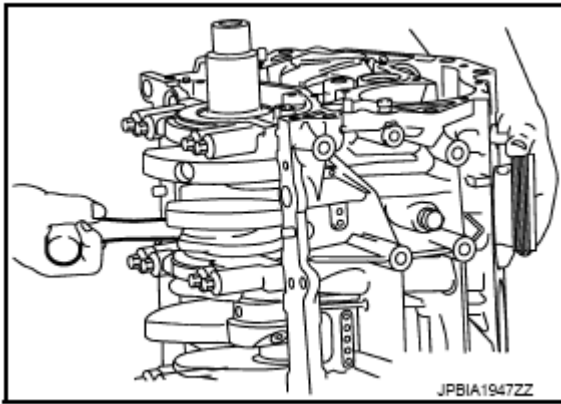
Pushing Piston And Connecting Rod Assembly Using Hammer Handle
